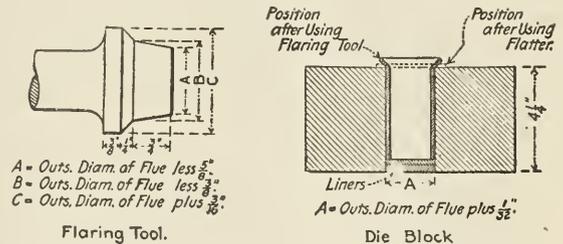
Flaring Tool and Die Block for Flange Tests
